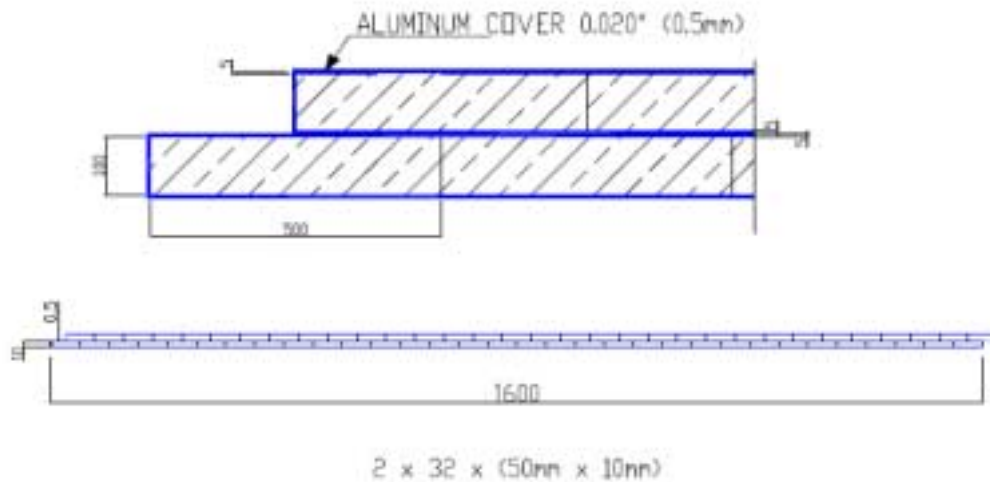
End view of 64-strip module. The detail shows the 0.02"Al skin surrounding each 32-strip layer
